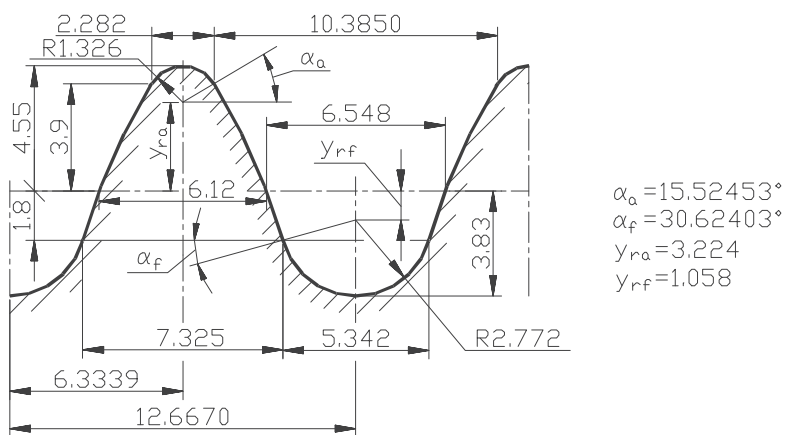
Cutting edge profile of tool for shaping a gear wheel (in normal section)
